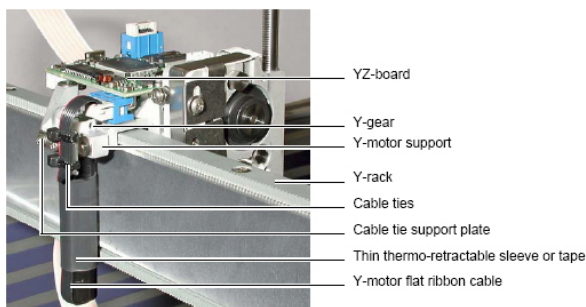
Y-motor assembly with spring-loaded Y-motor support
